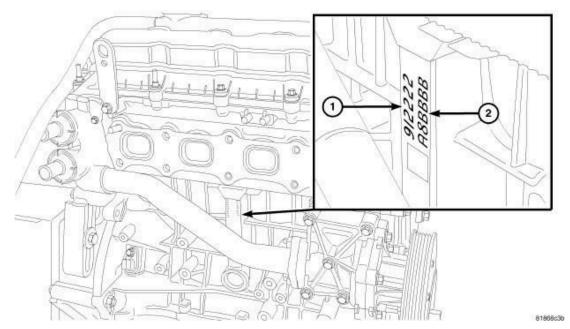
Upper Main Bearing Shell Identification Courtesy of CHRYSLER GROUP, LLC
